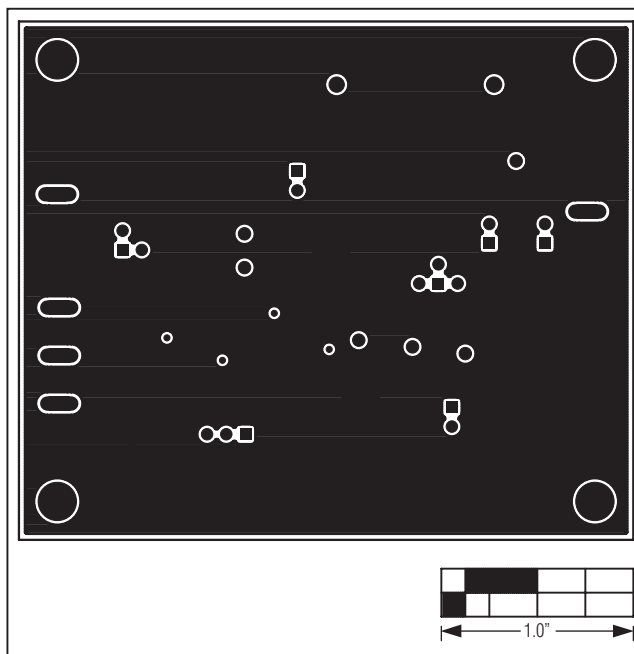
MAX16946 EV Kit PCB Layout—Inner Layer 2
